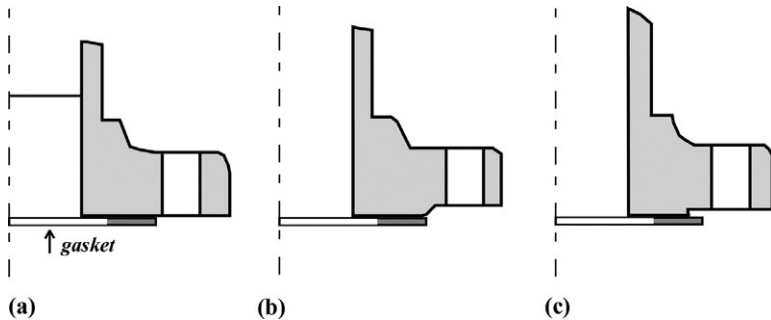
Commonly used flanges with various geometries. (A) Flat face flange, (B) large raised face flange, and (C) small raised face flange.
